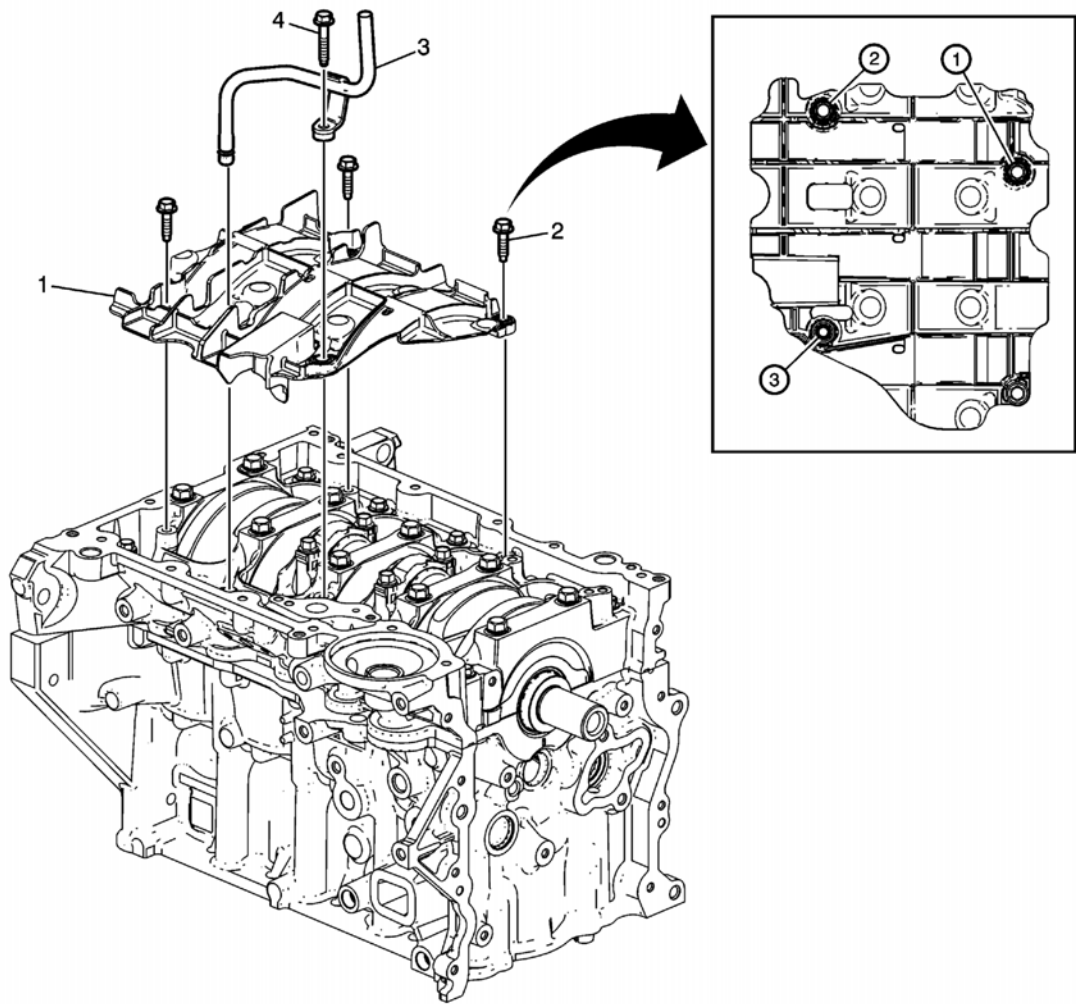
Crankshaft Oil Deflector (With Bolt Tightening Sequence)
